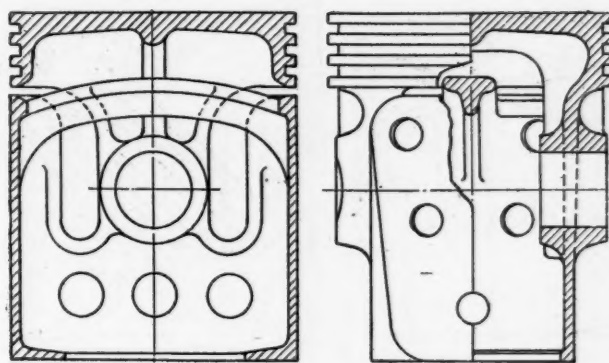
Type of constant clearance aluminum piston with steel strut cast integrally with slipper portion
